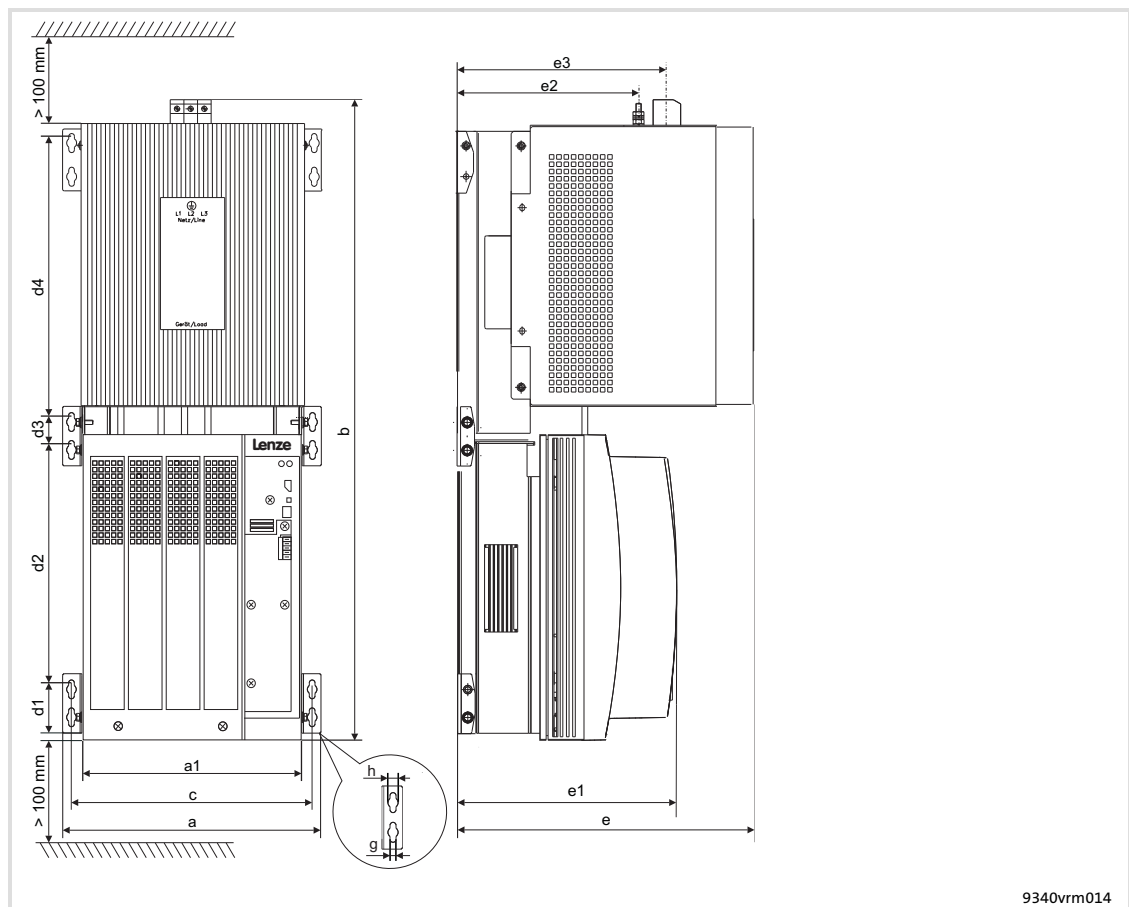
Dimensions of EMB9343-E with mains filter for mounting with fixing brackets
